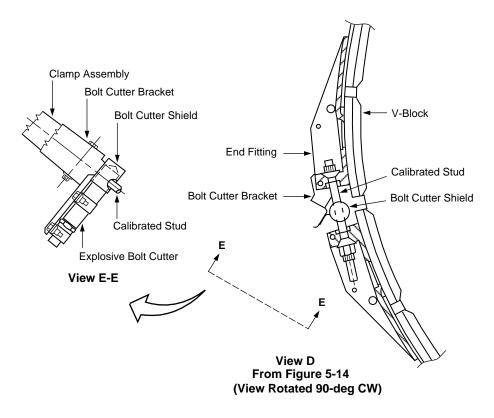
3712 PAF Bolt Cutter Detailed Assembly (Download Figure)
